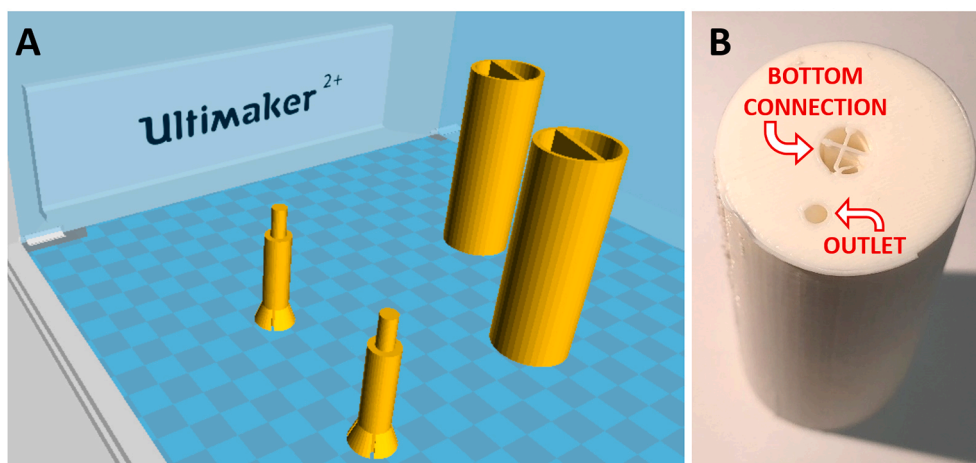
(A) Orientation of the spiral-RIAC and its bottom support element for the 3D printing manufacturing process. The image is captured from the 3D printer software (CURA). (B) Bottom surface of the spiral-RIAC showing the mixing channel outlet and the hole for connection between the main RIAC's body and the bottom support.
